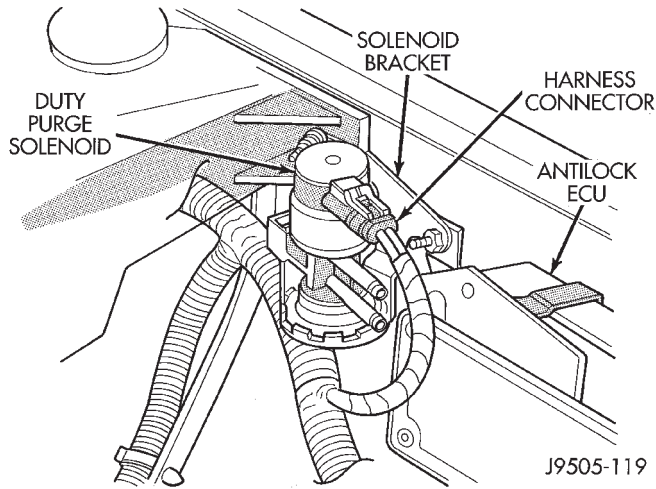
Duty Purge Solenoid And Bracket Mounting
